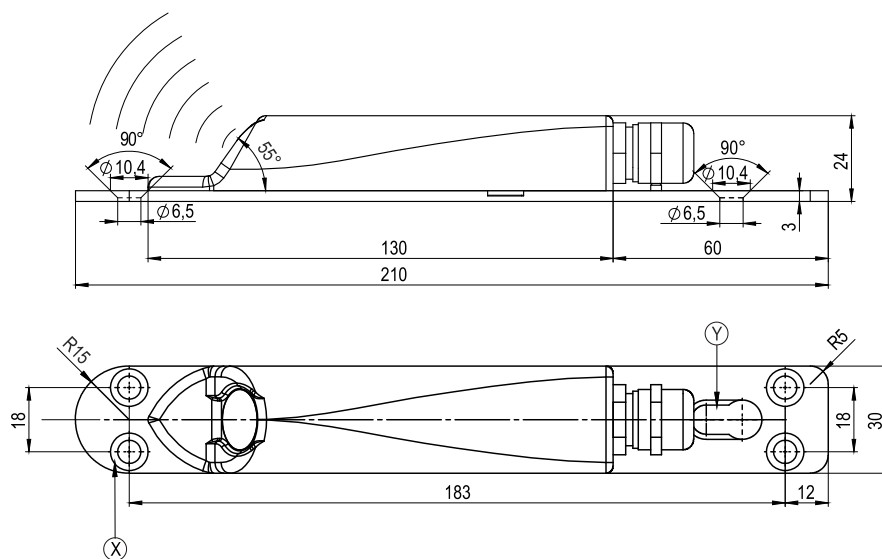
Dimensioned drawing Sensor CSM-V100K
